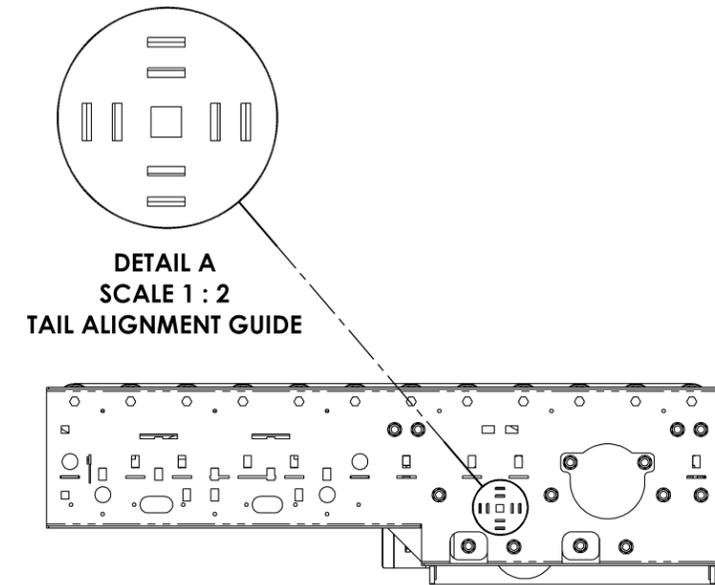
General Arrangement, RLVAC Bed Section, Sheet 2 of 2
